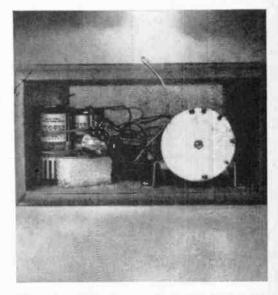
Assemble cabinet on base. Note block which holds batteries.
